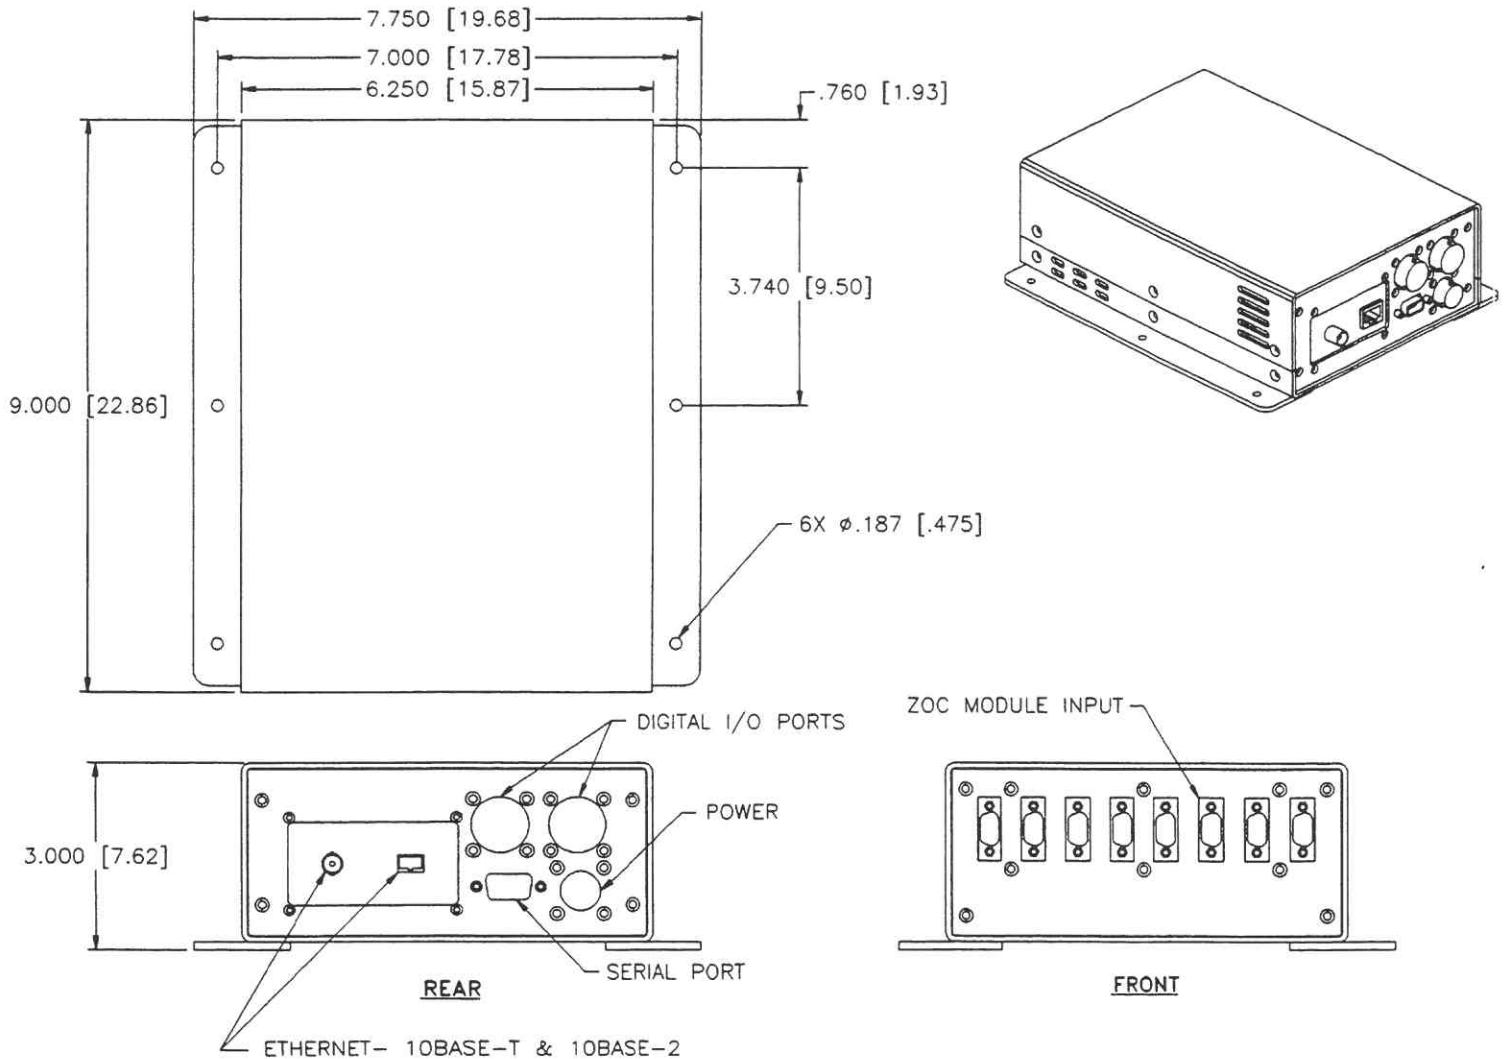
DSM3001 Physical Measurements and Mounting Dimensions
